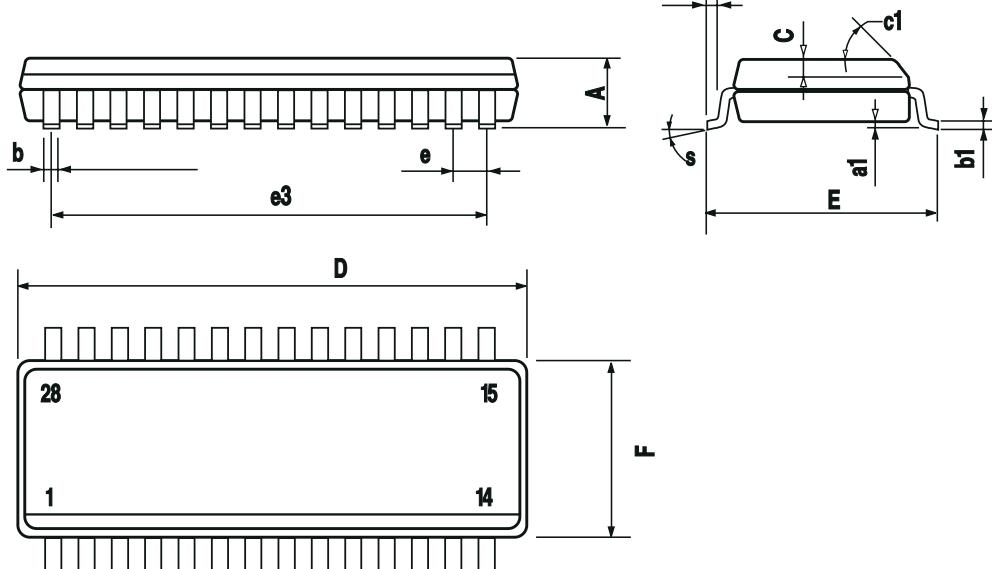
SO28 Mechanical Data &amp; Package Dimensions
